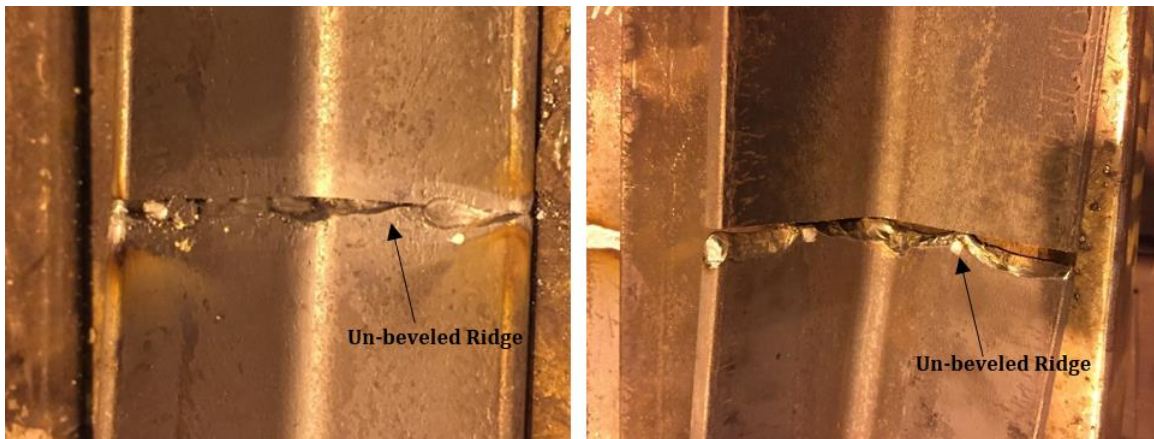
Manufacturing cracks in the welds by leaving out a part of the bevels
